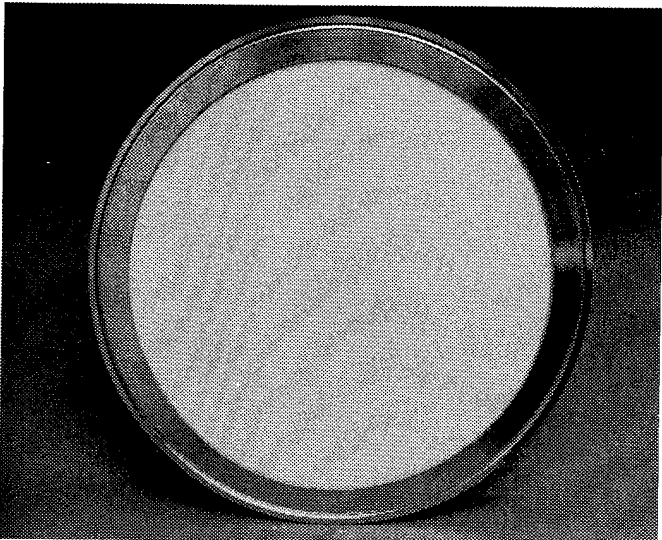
Ceramic disk with brazed stainless steel compression ring and post-machined knife-edge seal.
